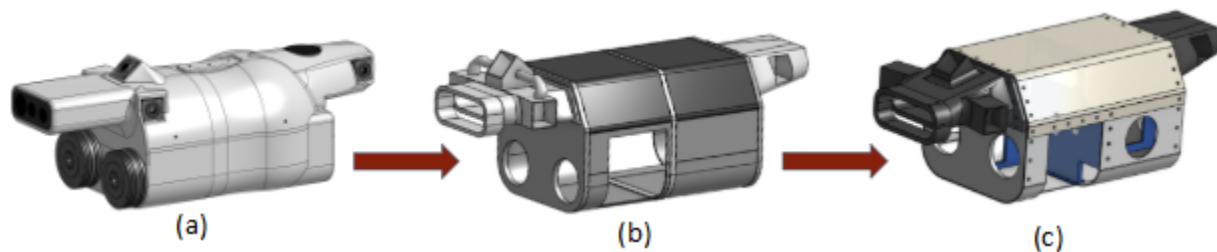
Body design iterations. (a) 3D printed design. (b) Four-piece sheet metal design. (c) Chosen two-piece sheet metal design
